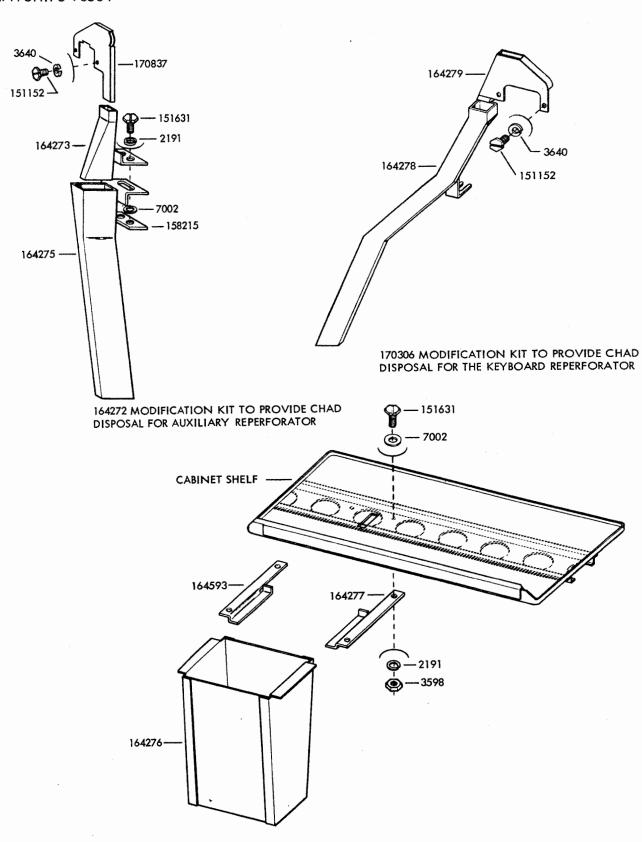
A. PARTS SUPPLIED WITH CABINET CY-3682/UG
